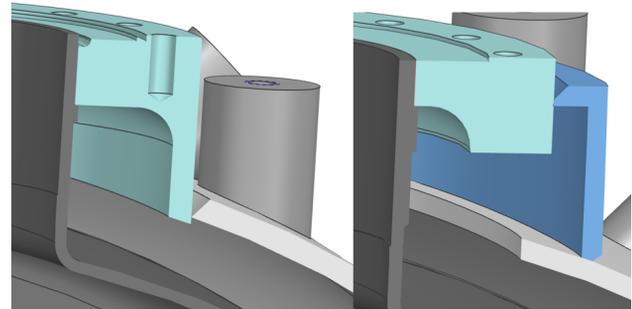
SSR1 Spoke Flange, Prototype Design (left), Production Design (right)
